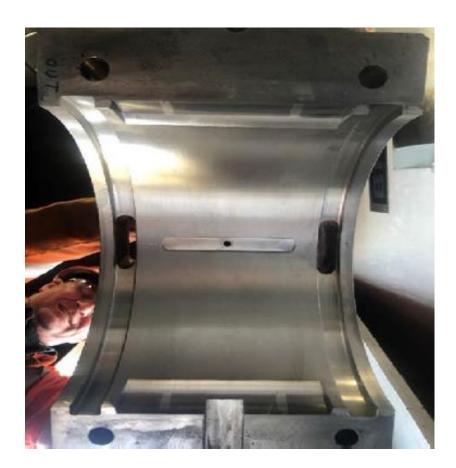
New Alternator Exciter End Bearing Lower Half Prior to Installation
